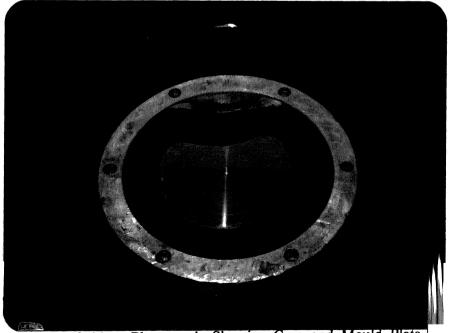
Photograph Showing Core and Mould Plate Convex-concave Surfaced Ring
